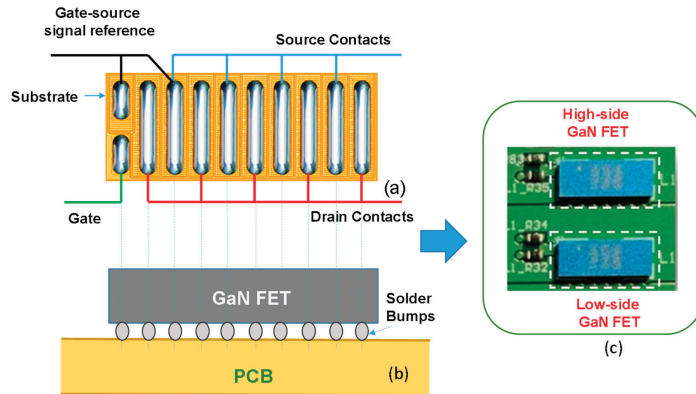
(a). Package description of solderable bars with source, drain, gate, and substrate contacts. (b) Package on the PCB arrangement. (c) Picture of a top layer of a half-bridge PCB with two devices in the CSP package.
